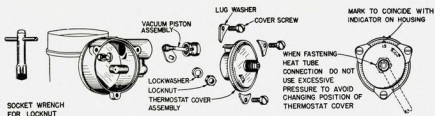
Exploded View of Automatic Choke Used on 1900.
